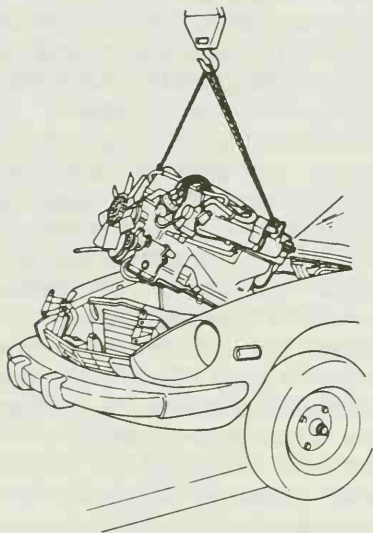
The engine must be removed for access to the clutch in some transaxle arrangements. (Nissan Motor Corporation in USA)
